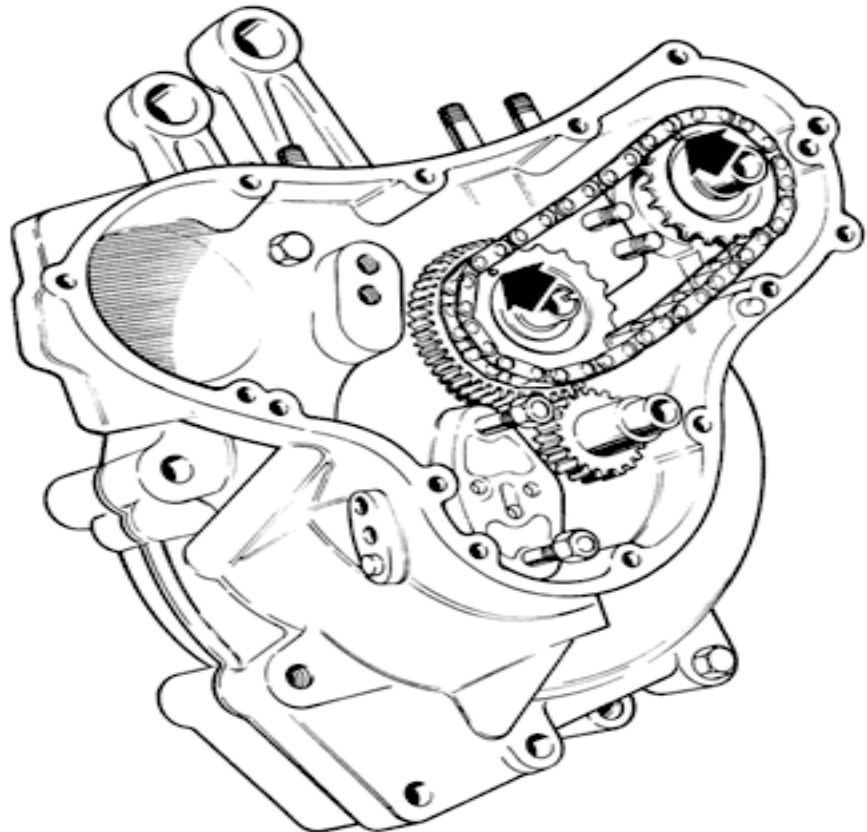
Mating crankcases. Note the camshaft is held against the spring and disc with the finger
